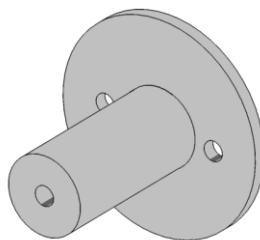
Drawing of the nozzle used to collimate the molecular beam.
